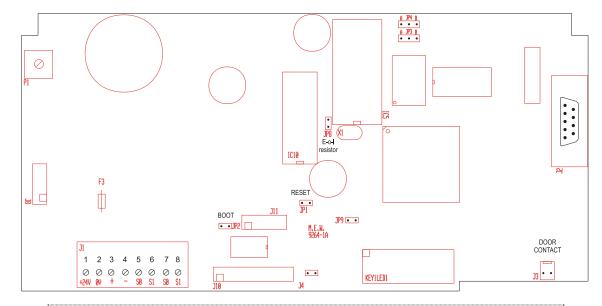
1728 PCB Position of terminal block "J1", jumper "JP8"
